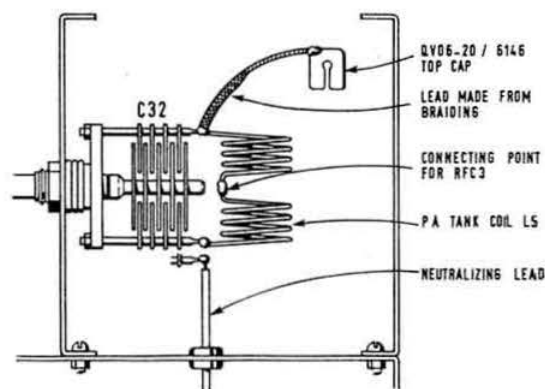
Side elevation showing essential layout details of p.a. tank circuit.
